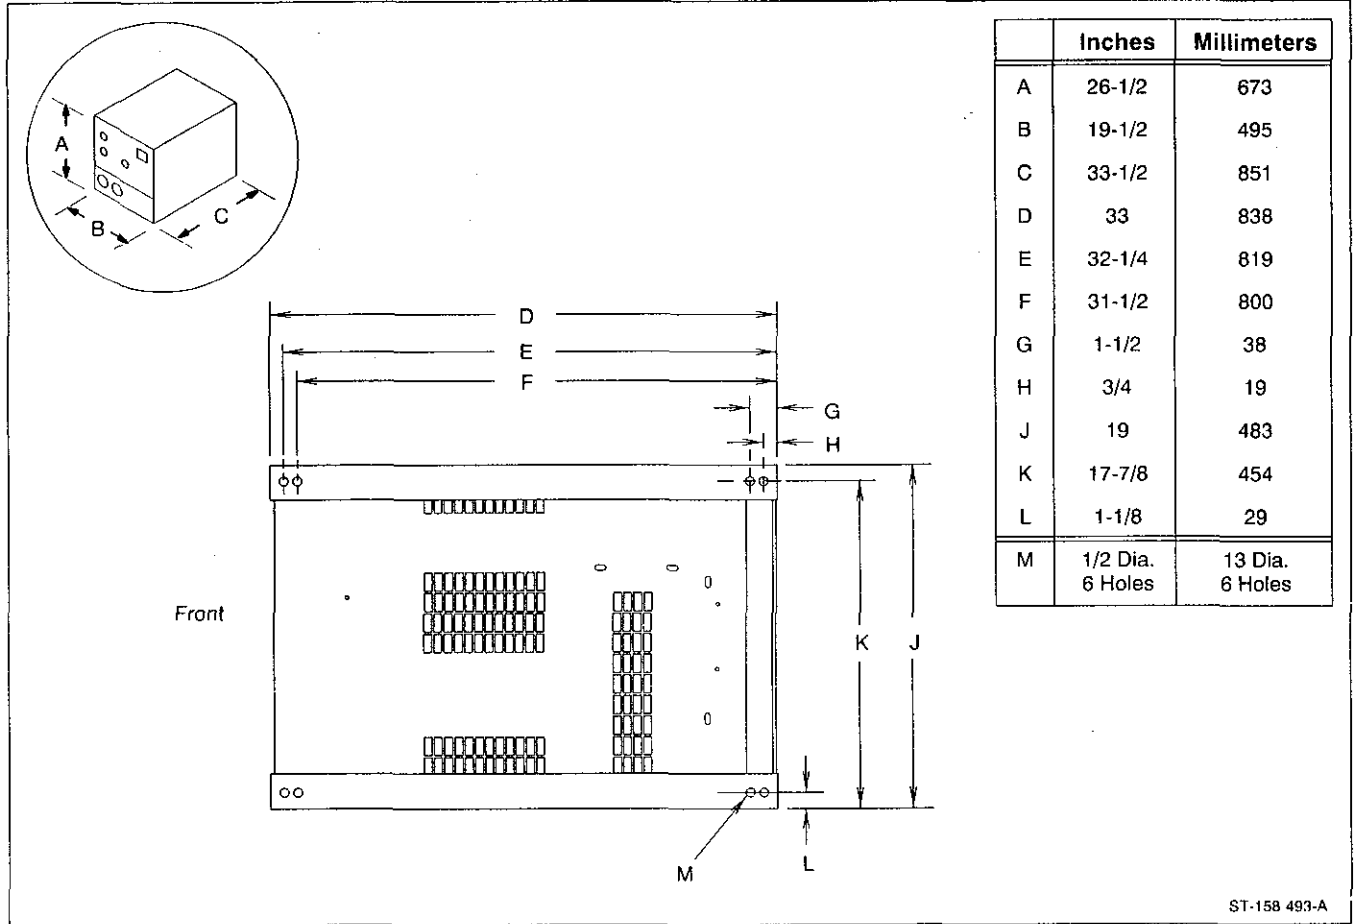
Overall Dimensions And Base Mounting Hole Layout
